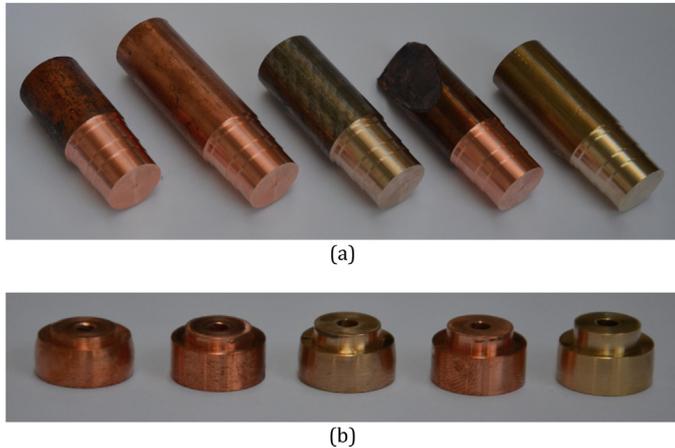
The five tested materials: (a) machined samples (ϕ 35 mm); (b) hat-shaped specimens (ϕ 14 mm) after compression.
